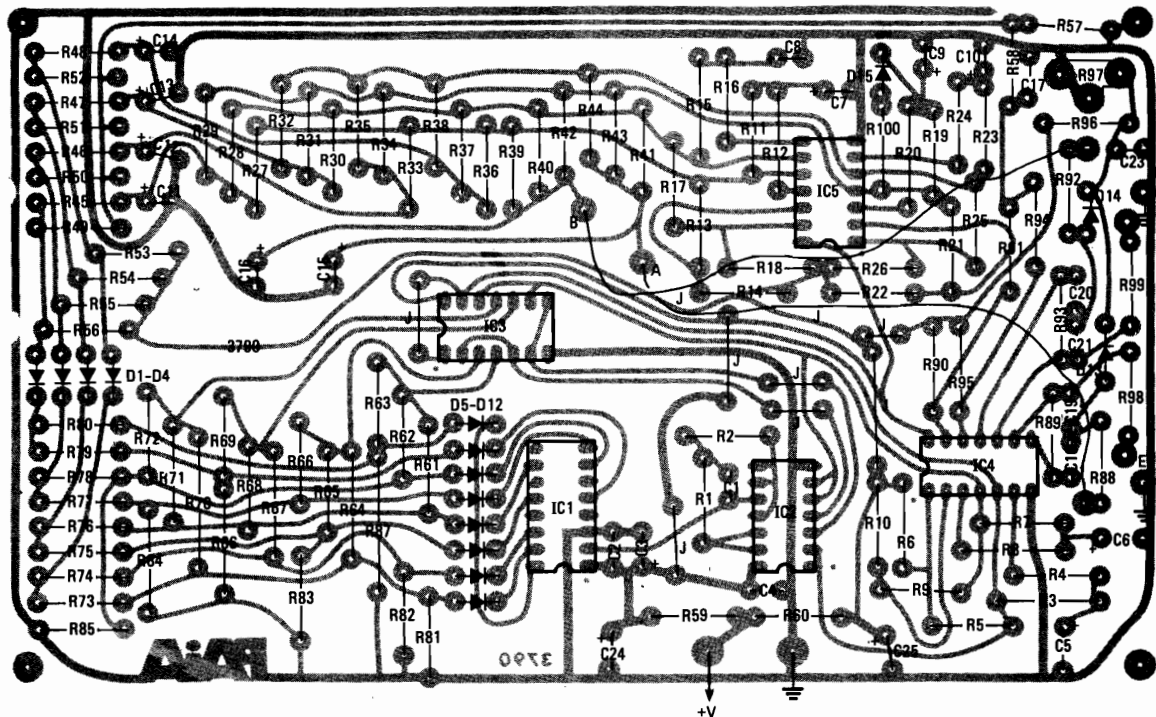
PARTS PLACEMENT DIAGRAM shows exactly where every component is mounted on the circuit board.
